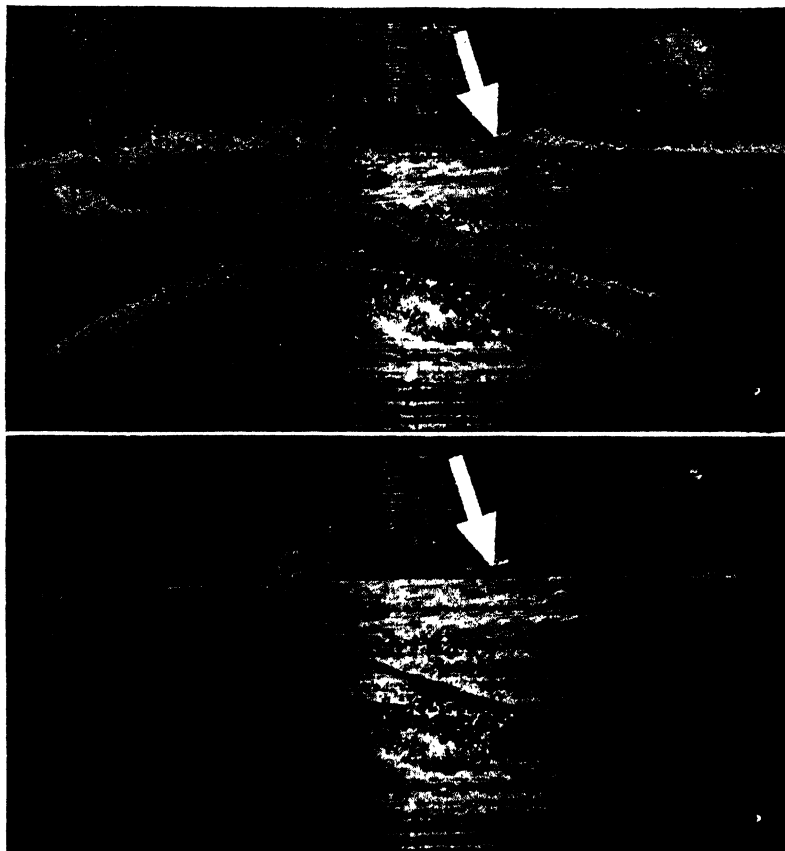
Top: Iron particles outlining cracks; arrow pointing to crack which is partly subsurface. Bottom: Rough machined surface—visual cracks.
